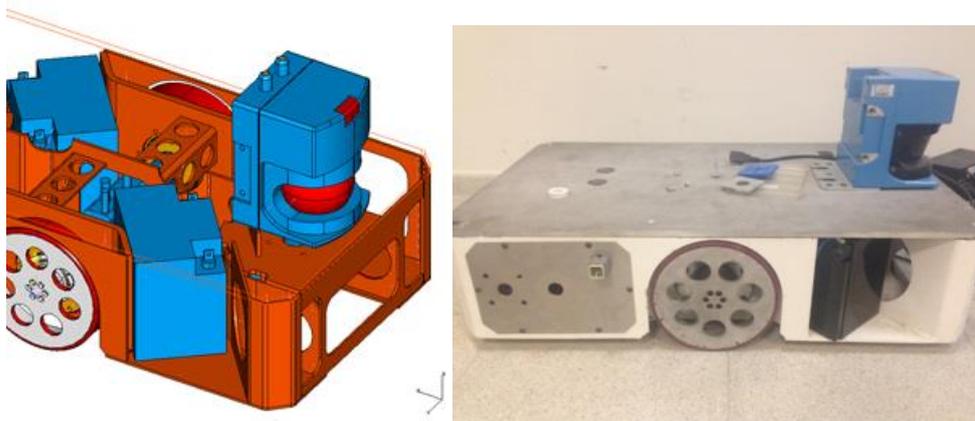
CAD Drawing and photo of LMS 200 with a mobile robot
